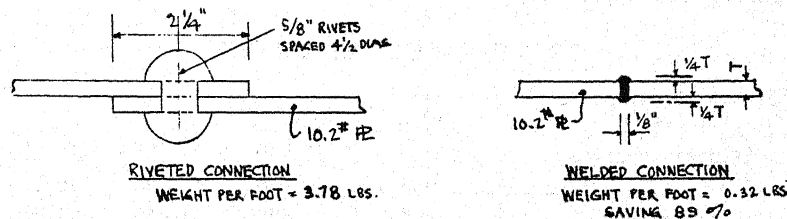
Comparative weight—riveted and welded bulkhead plating seams and butts.
